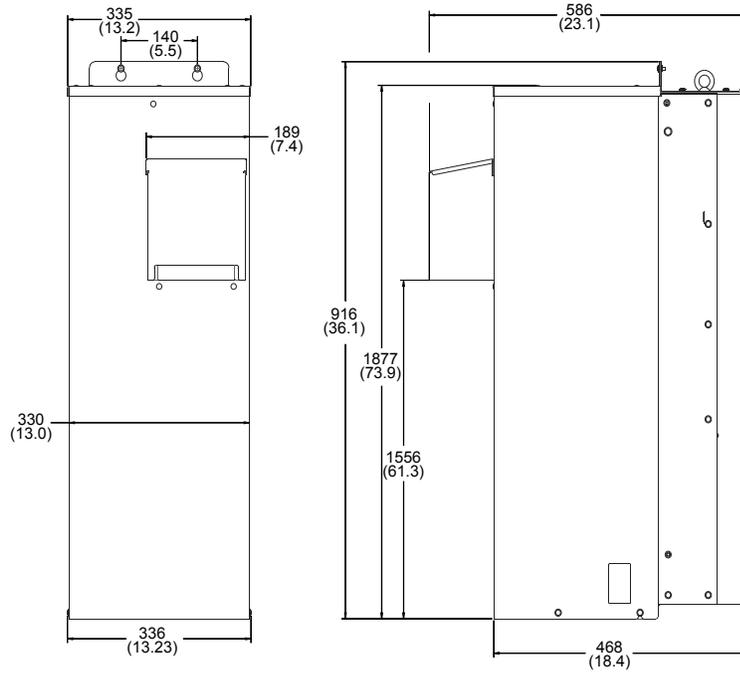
Exterior dimensions for D1h with NEMA 3R Kit (9K715)
